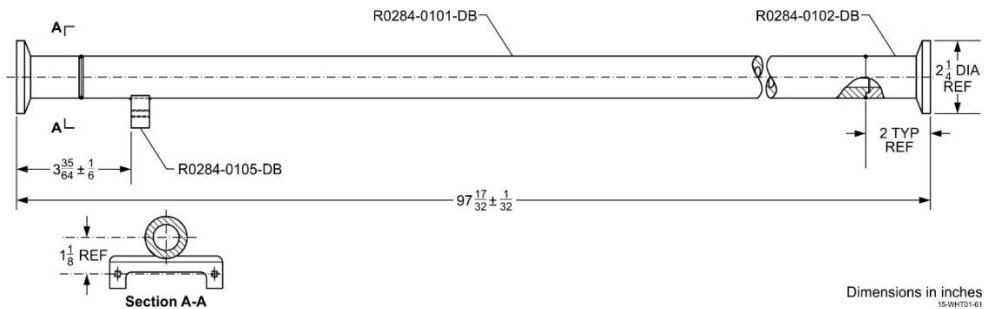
Spool Piece Assembly M2CAL (DWG# R0288-0002) [1].
